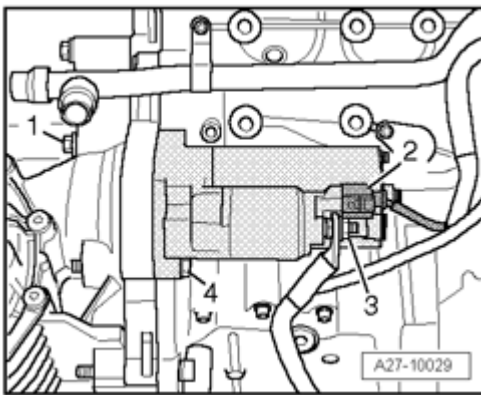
Disconnecting Electrical Wires On Starter, Removing Bolts & Starter
